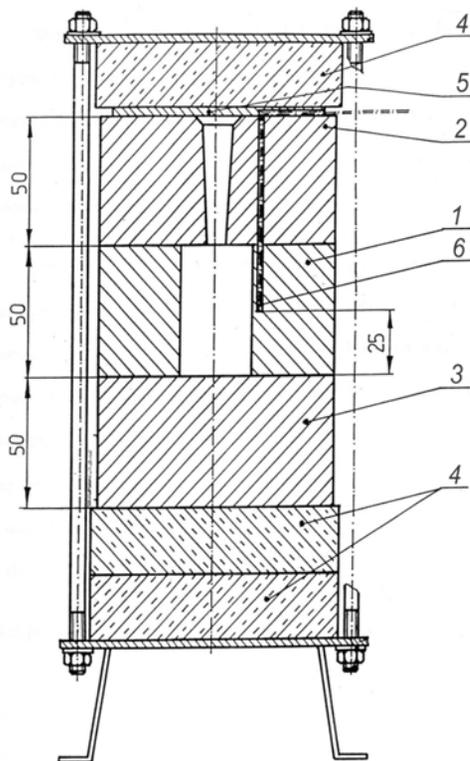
Test mould: 1 – test shape (mould), 2 – upper insulating shape, 3 – lower insulating shape, 4 – insulating disc, 5 – aluminosilicate paper, 6 – thermocouple.
